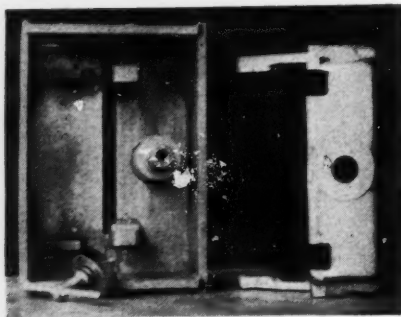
Interior of Jig Shown in Fig. 3, Showing that Smooth Surfaces are Obtained without Machining
